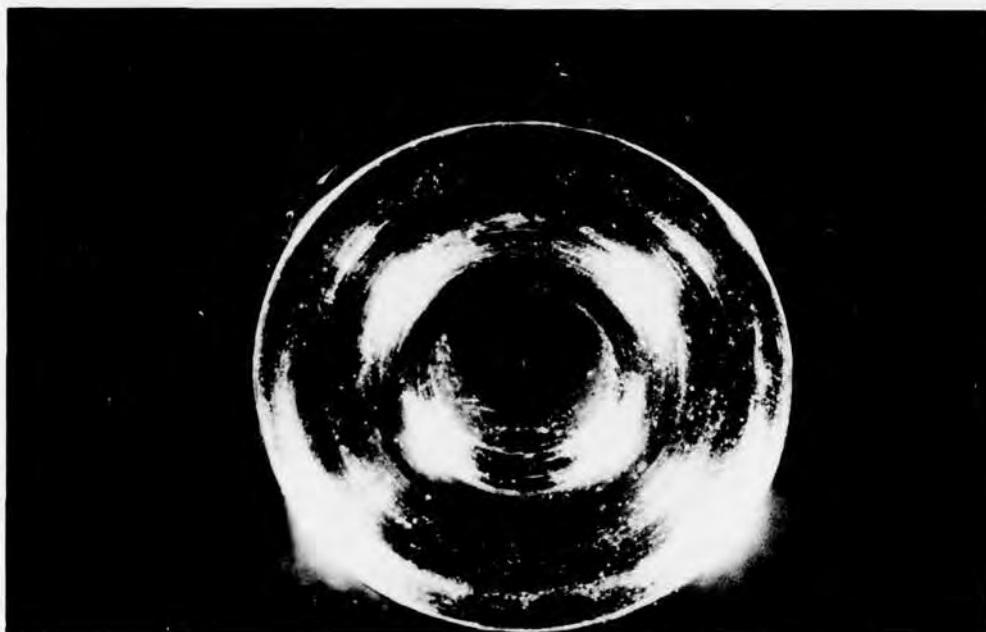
Ramp-Roller Clutch Roller, End Face Wear.
